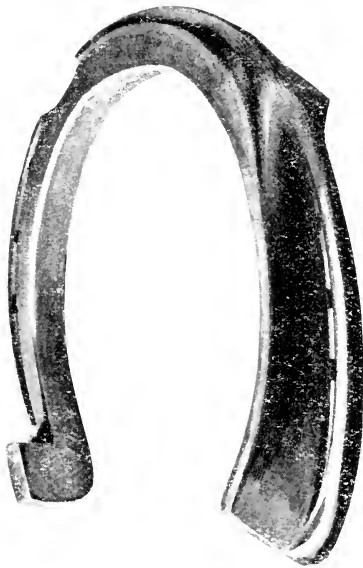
Side view of above special hind shoe for horse which cuts his fetlocks.
